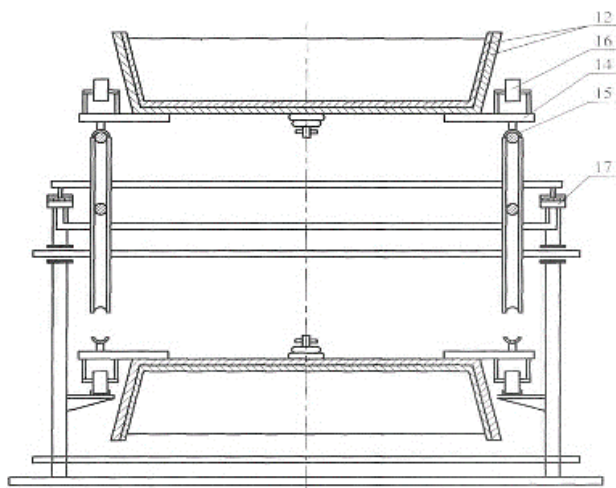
Cross-sectional view of the rope-and-slat conveyor.
